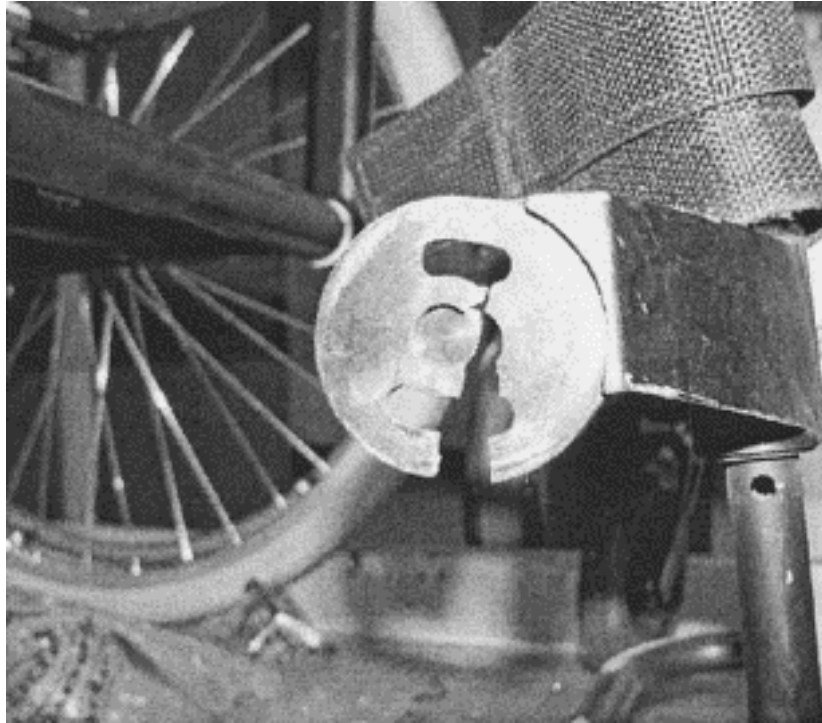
Failure of the Right Caster Mount on the Quickie XTR™ Chair 3
